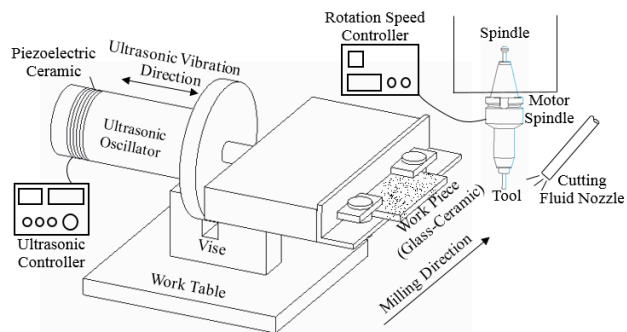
Experimental set-up for glass ceramic workpiece side milling
